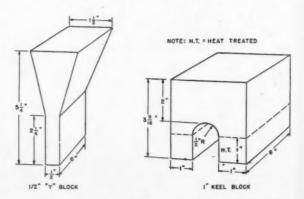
Location of test bars in 1/2 and 1-in. castings.
